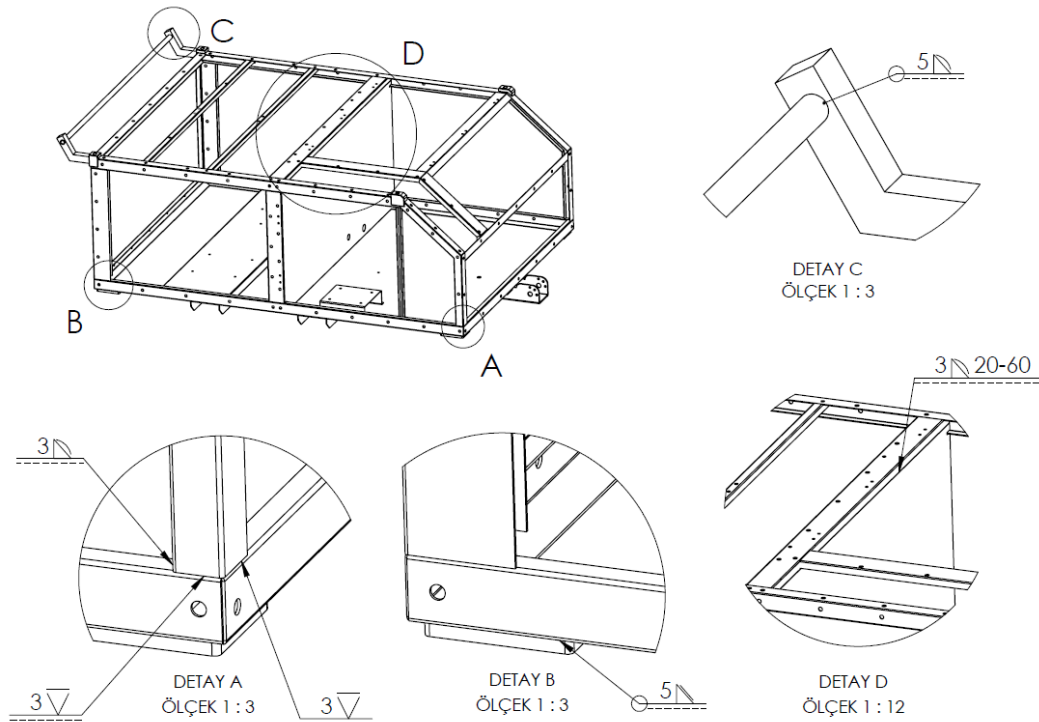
Sample weld symbols representations for the chassis
